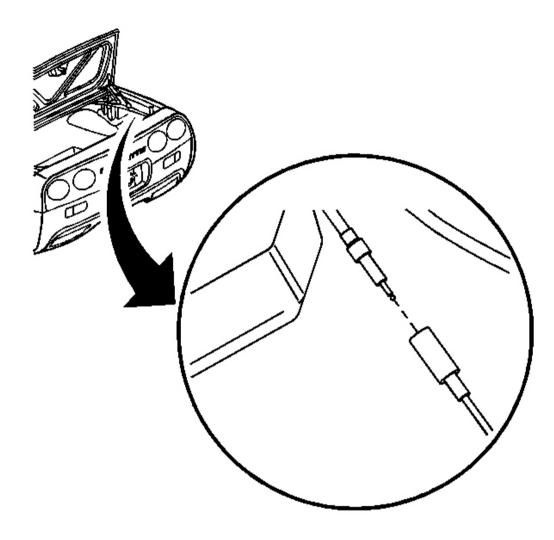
Antenna Coaxial Cable At Fixed Antenna Coaxial Extension Cable Courtesy of GENERAL MOTORS CORP.
